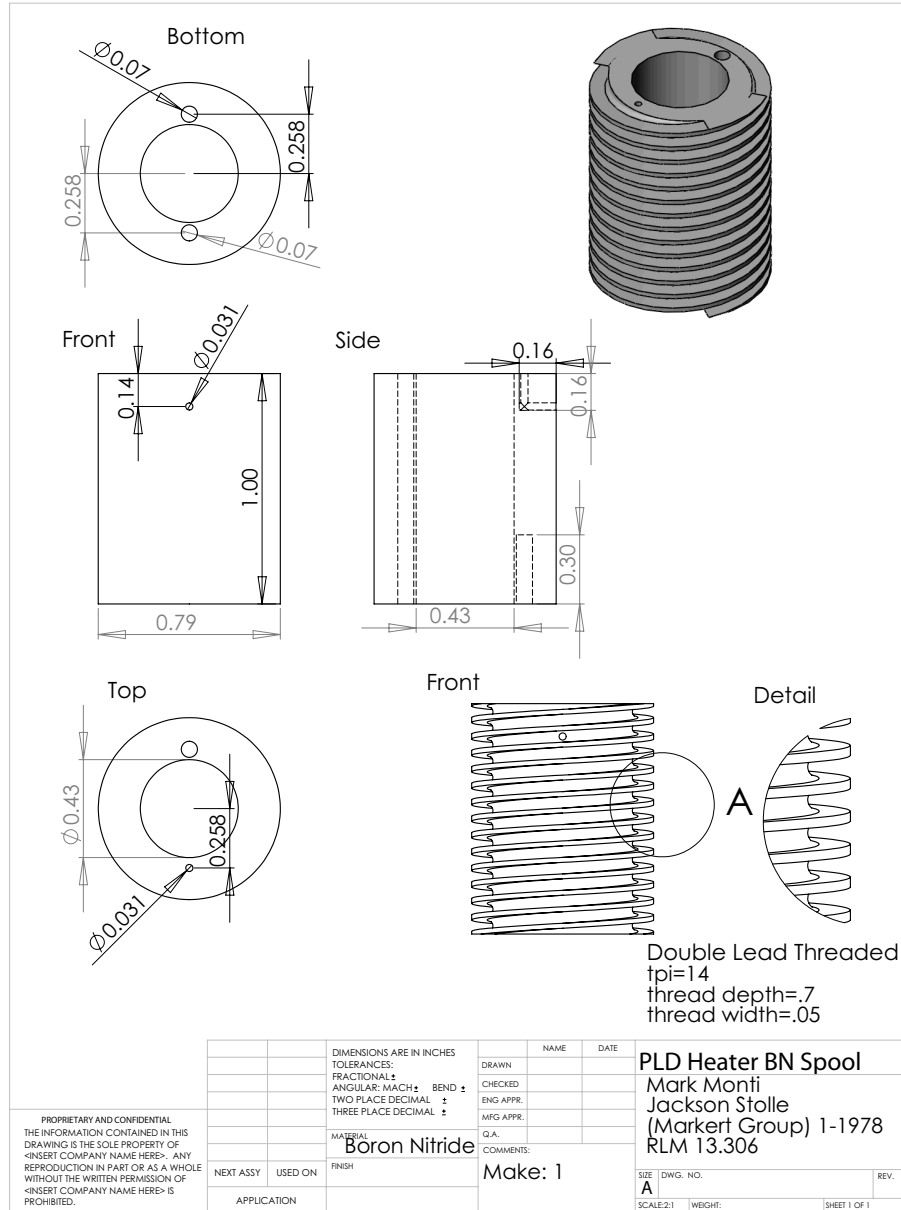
SolidWorks drawing of the boron nitride double lead threaded heater spool.
